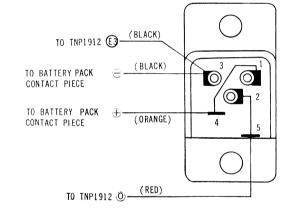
3P POWER SOCKET (REAR VIEW)
